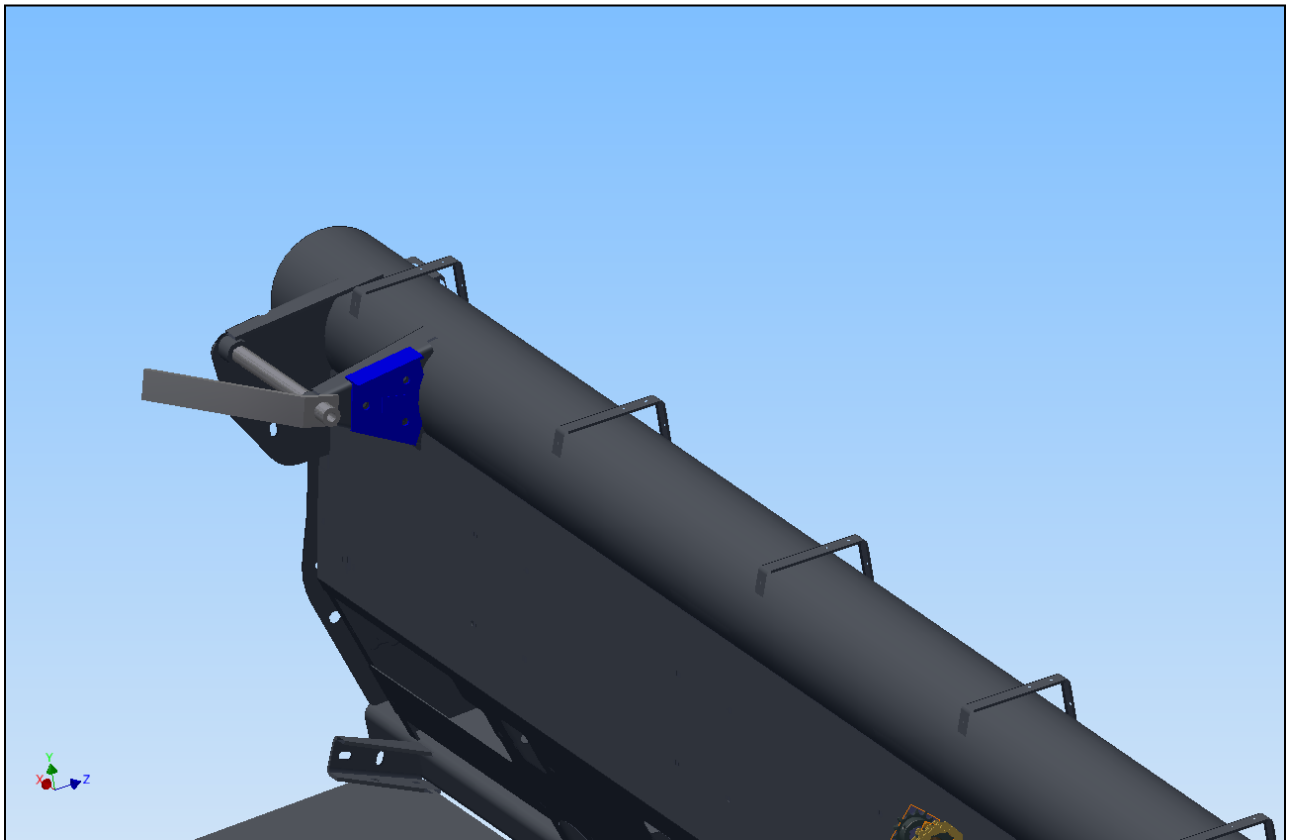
DRILLING RIGHT HAND MOUNT HOLES
